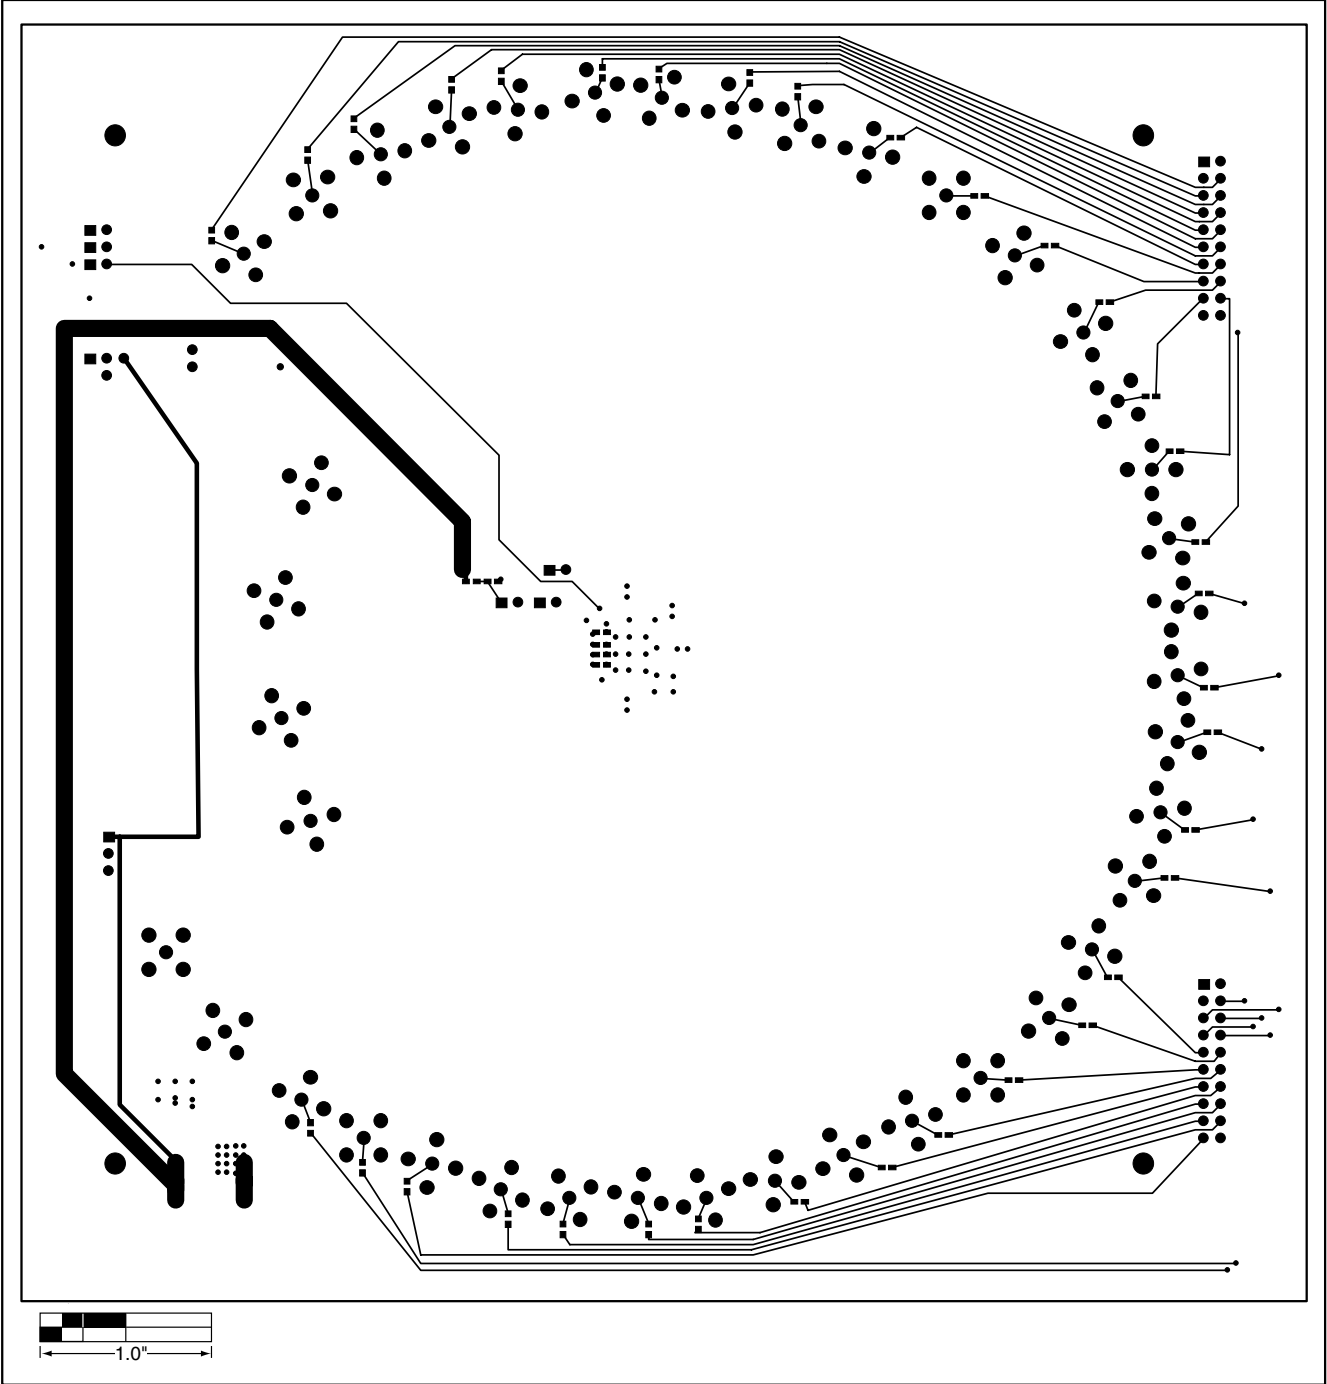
MAX3880 EV Kit PC Board Layout—Solder Side
